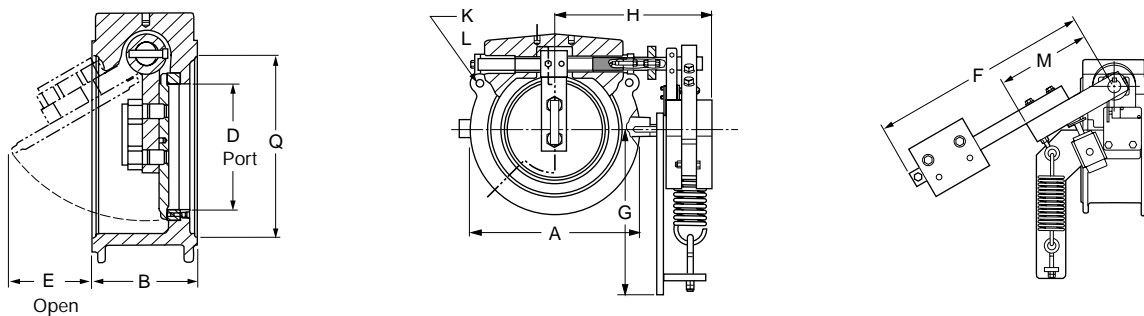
Valve Dimensions (Inches) Sizes 12-48 inch
